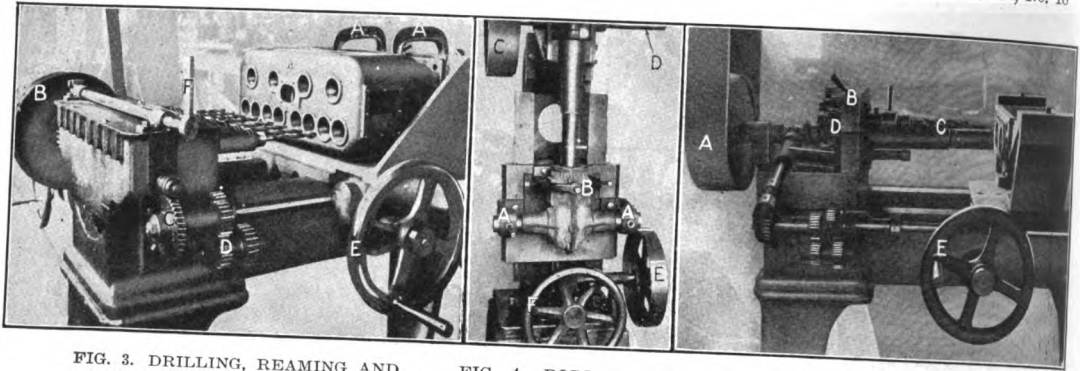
DRILLING, REAMING AND FACING THE VALVE GUIDE HOLES
